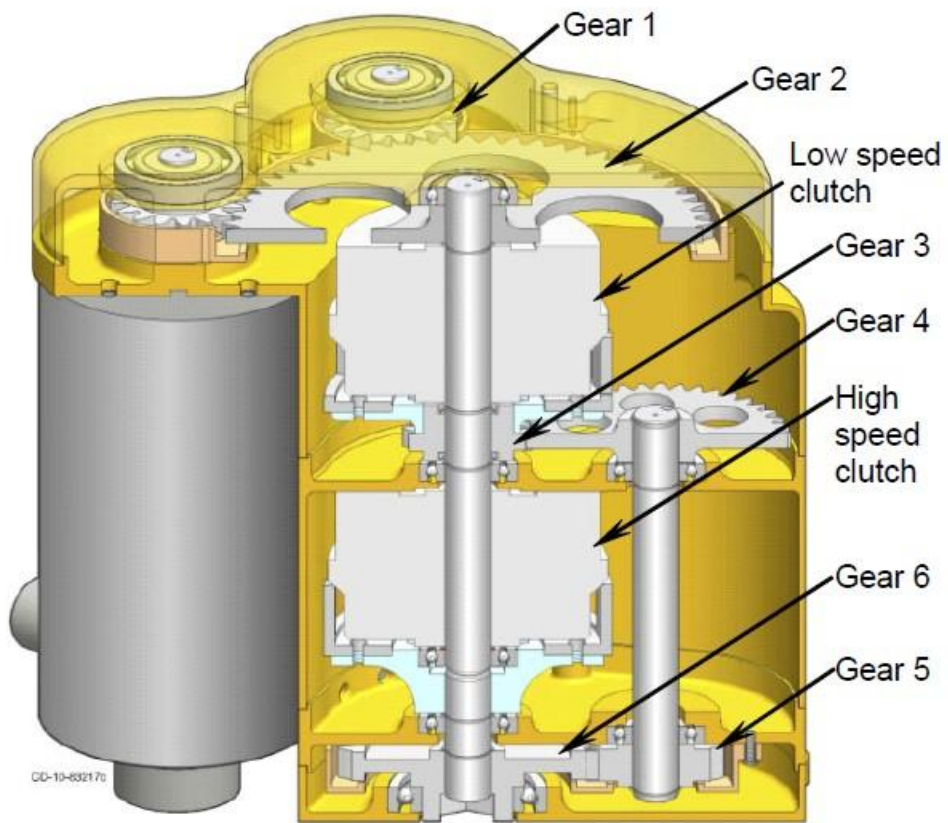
NASA Glenn Research Center Chariot gearbox design.
